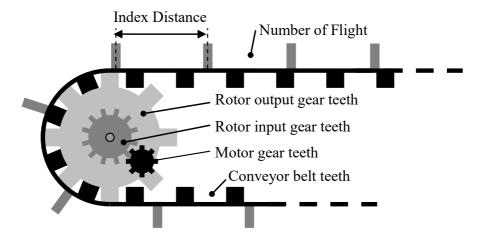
Relationship between motor, rotor and conveyor
